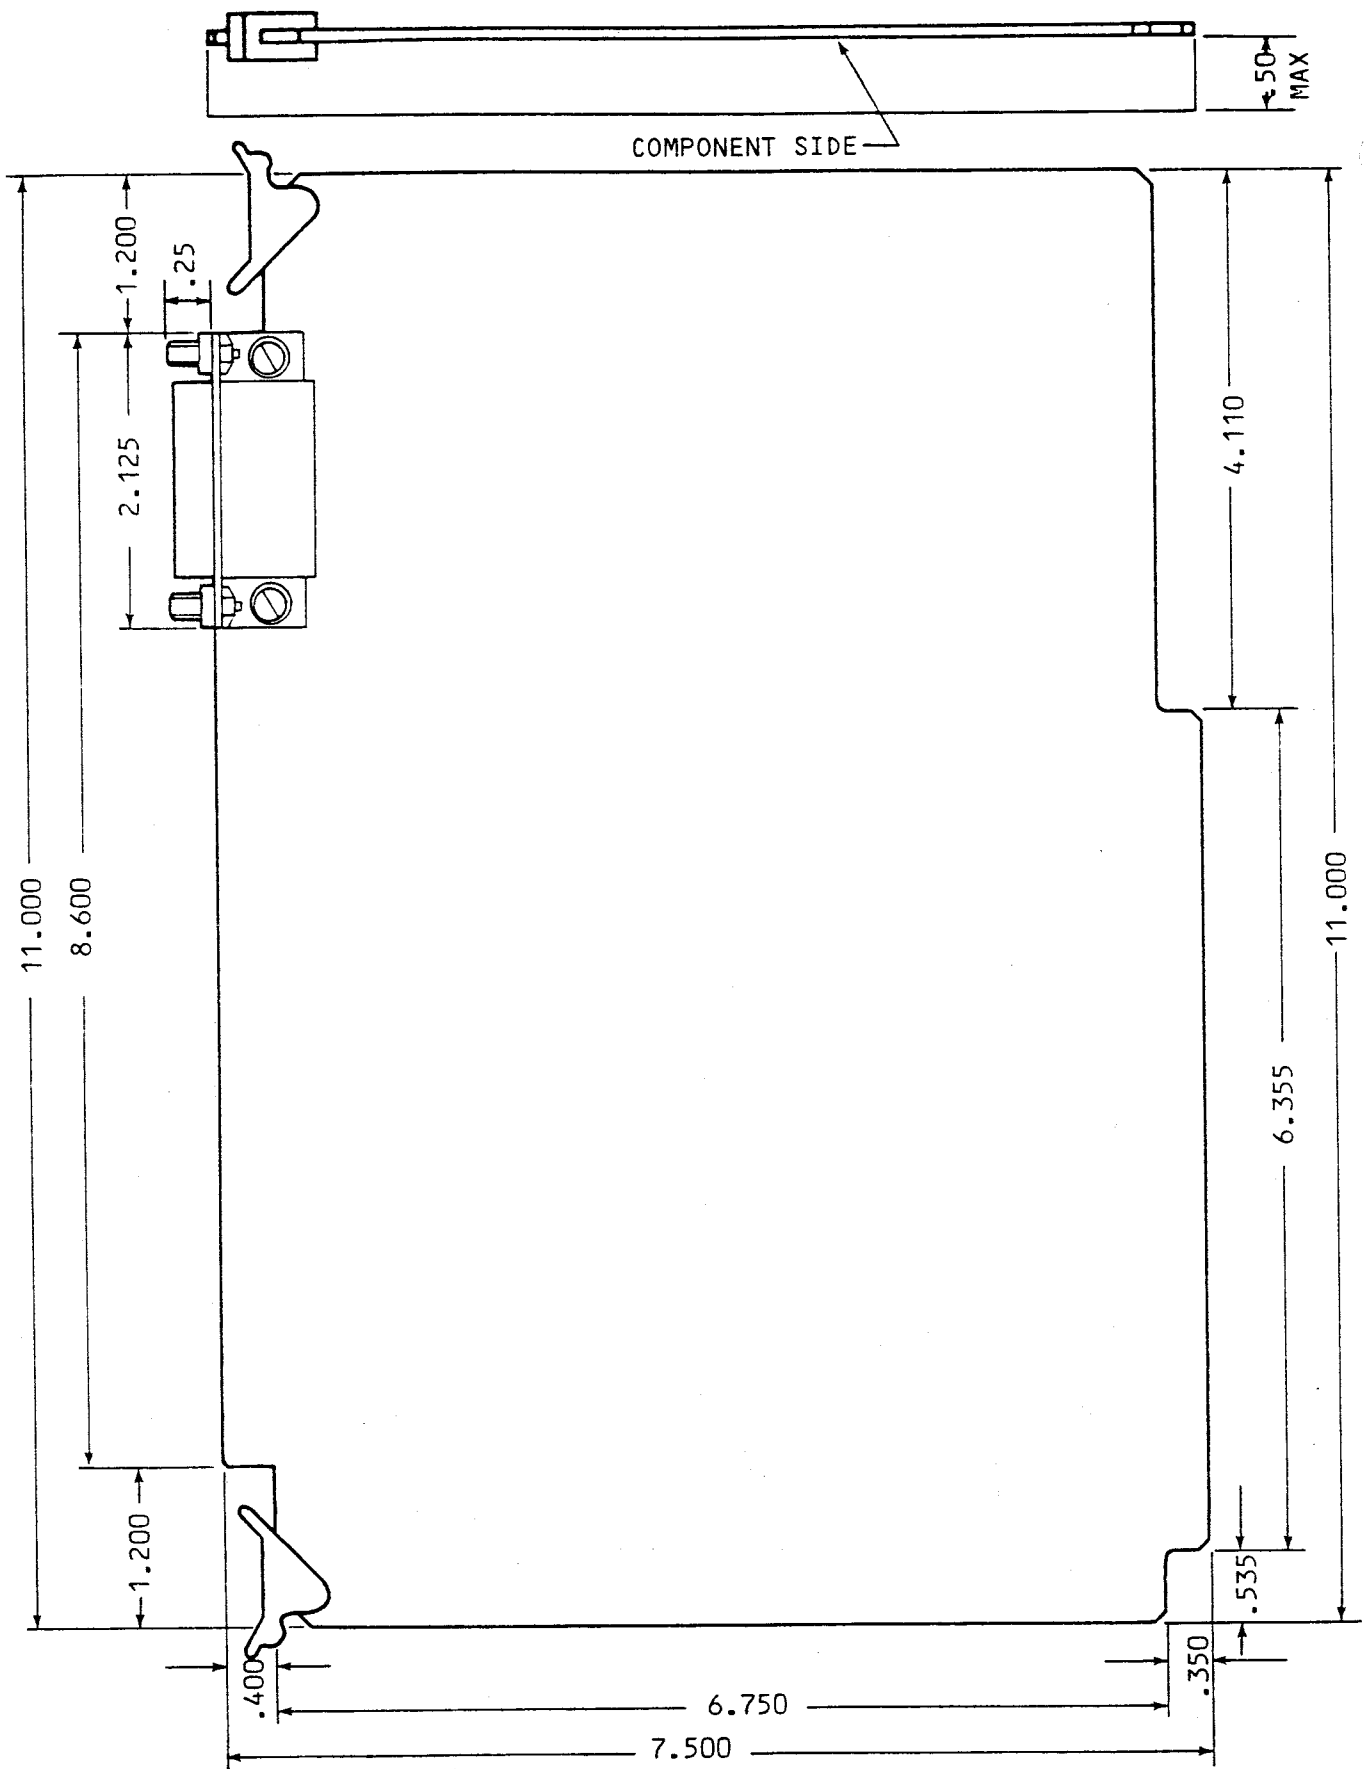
TM 990/308 MODULE DIMENSIONS (IN INCHES)
